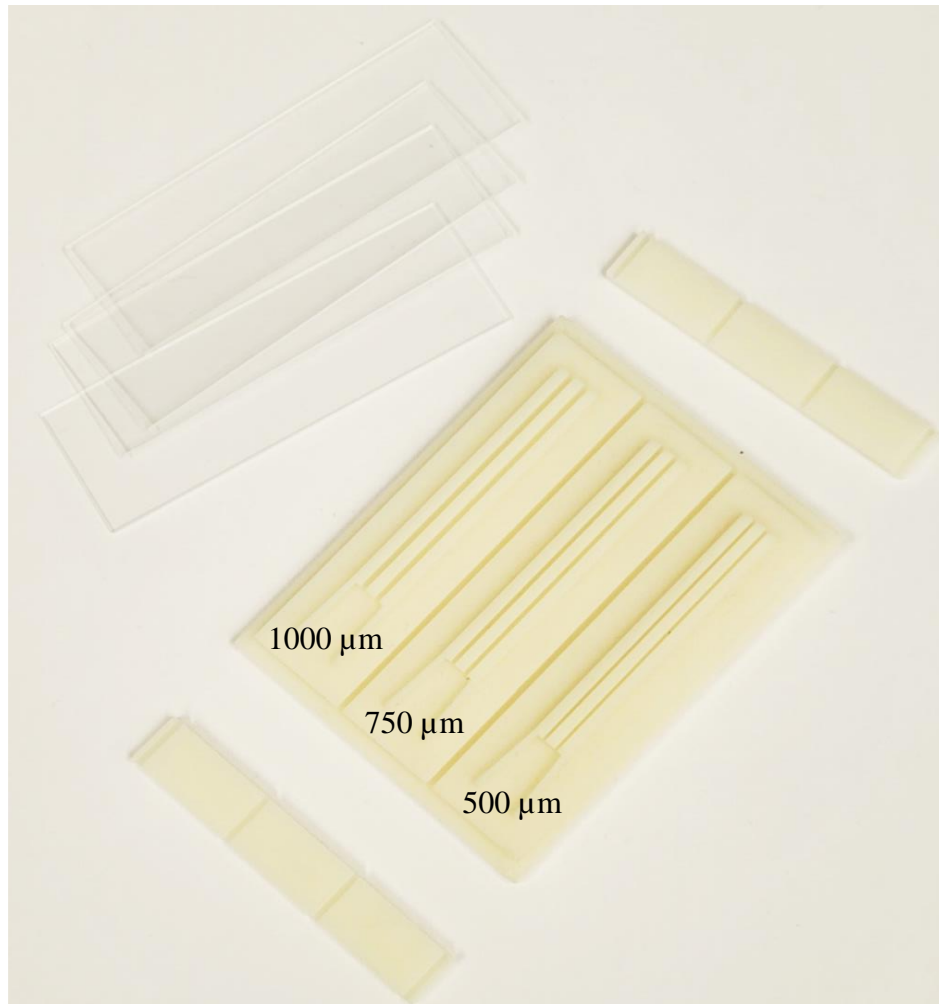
Third mold design consisting of the printed base, two printed sides, four standard microscope slides, and epoxy.
